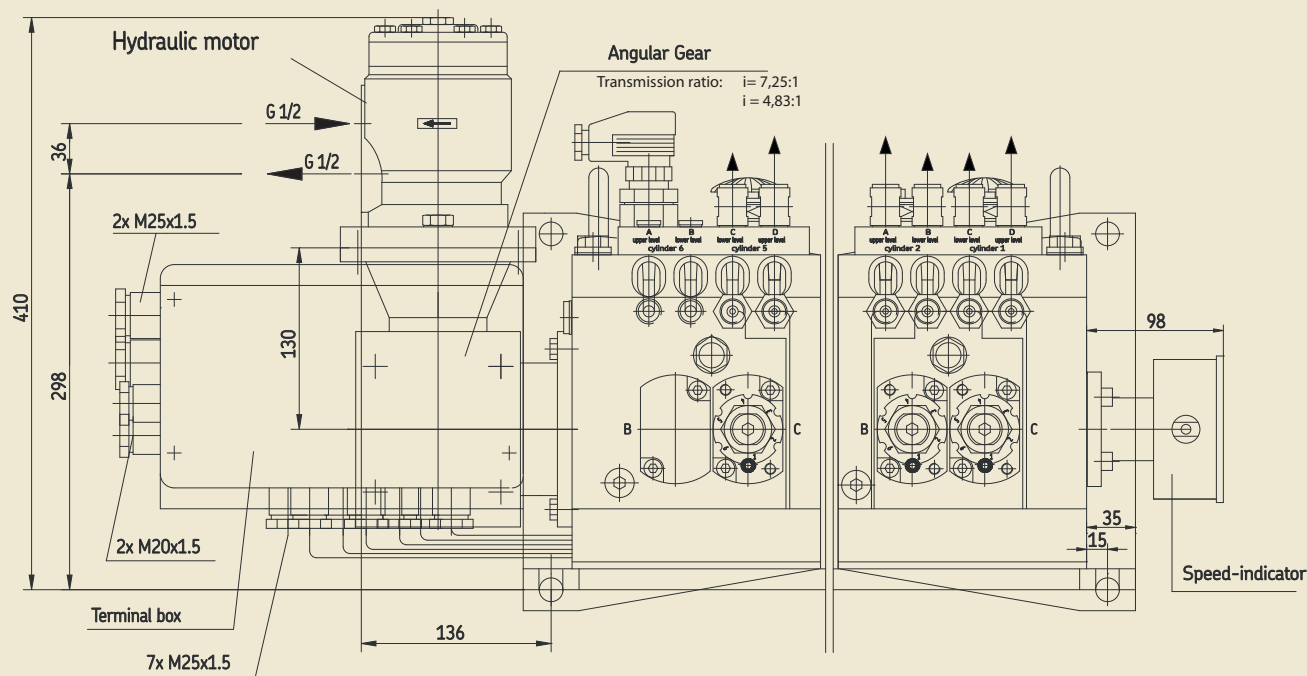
Assembly drawing of PC oil lubrication pump unit with hydraulic motor, side view
